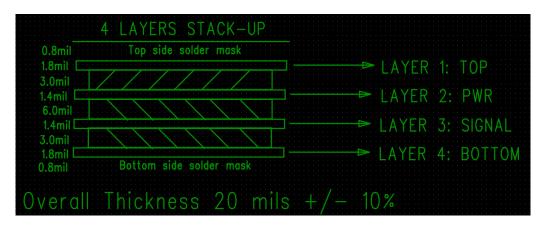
Cross section picture of the flex PCB stack-up. PRELIMINARY rigid!
